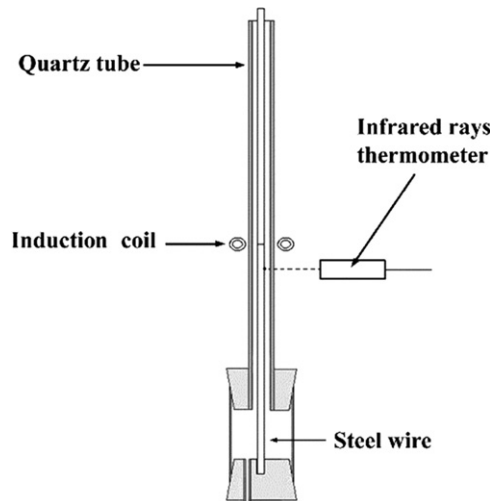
Schematic of induction welding setup for steel wire. Reproduced from Huang, C.-Y., *et al.*, 2013. Rapid welding of stainless steel wires using ultra-high frequency induction heating. *Journal of the Chinese Institute of Engineers* 36 (6), 806–809.
